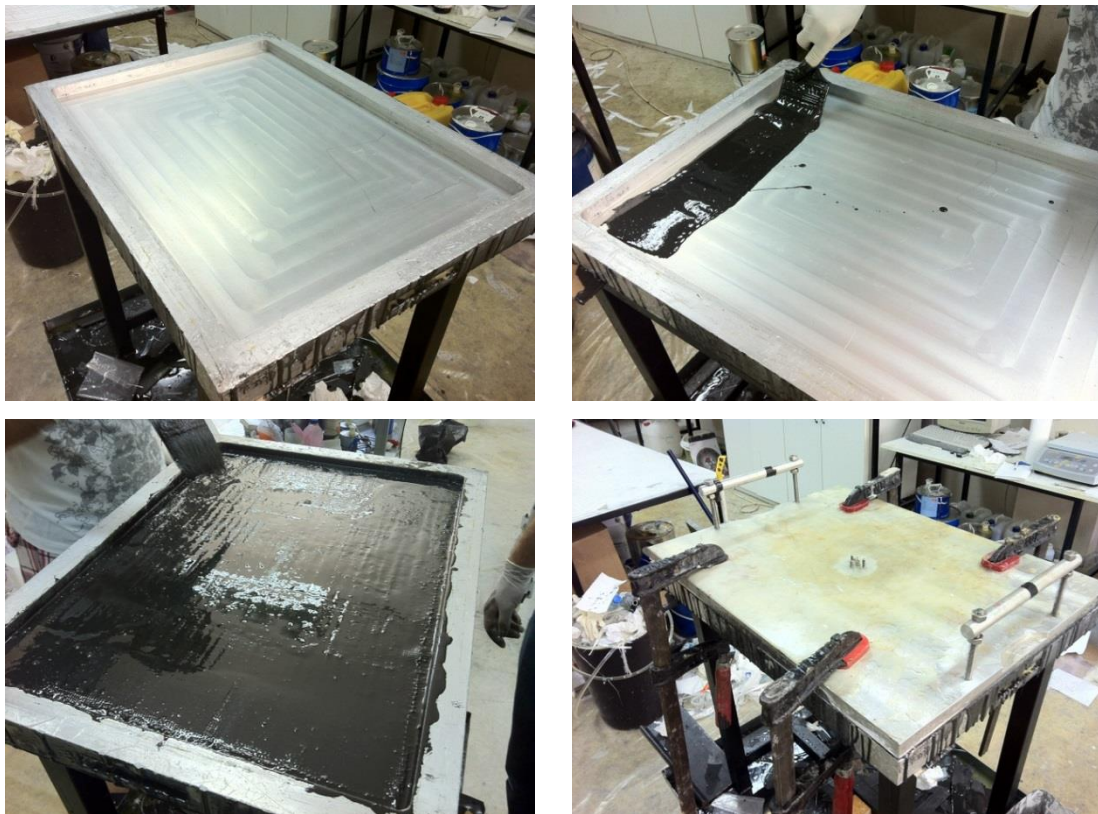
Step by step manufacturing of composites by hand lay-up technique
